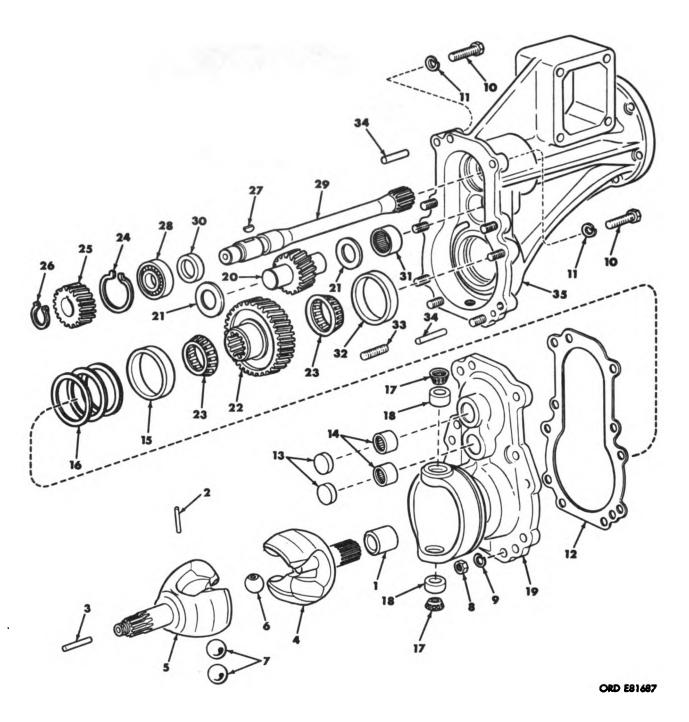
Removing or installing needle roller bearings and associated parts.
